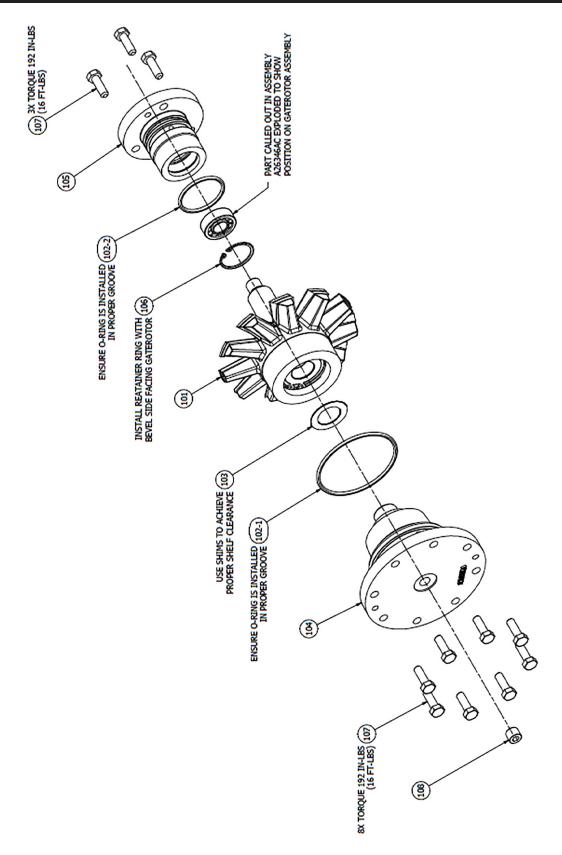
Gaterotor Assembly (VSM 97-127 Compressors ONLY)
